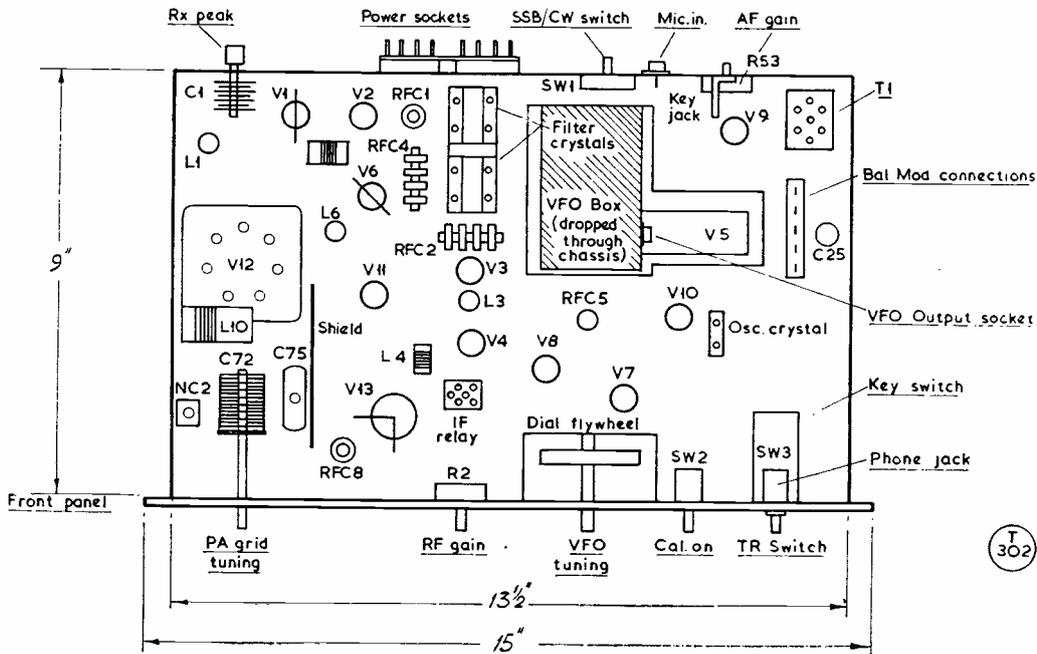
Sketch showing general chassis layout of the Transceiver — compare with the photograph p.627, February. The transformer T1, the two relays, the balanced modulator and filter unit, with the choke Ch.1, are mounted above the chassis. The VFO box is held rigidly half-way through so that its upper side is below panel level; the filter crystals are in holders mounted upside down against the under-face of the chassis.
